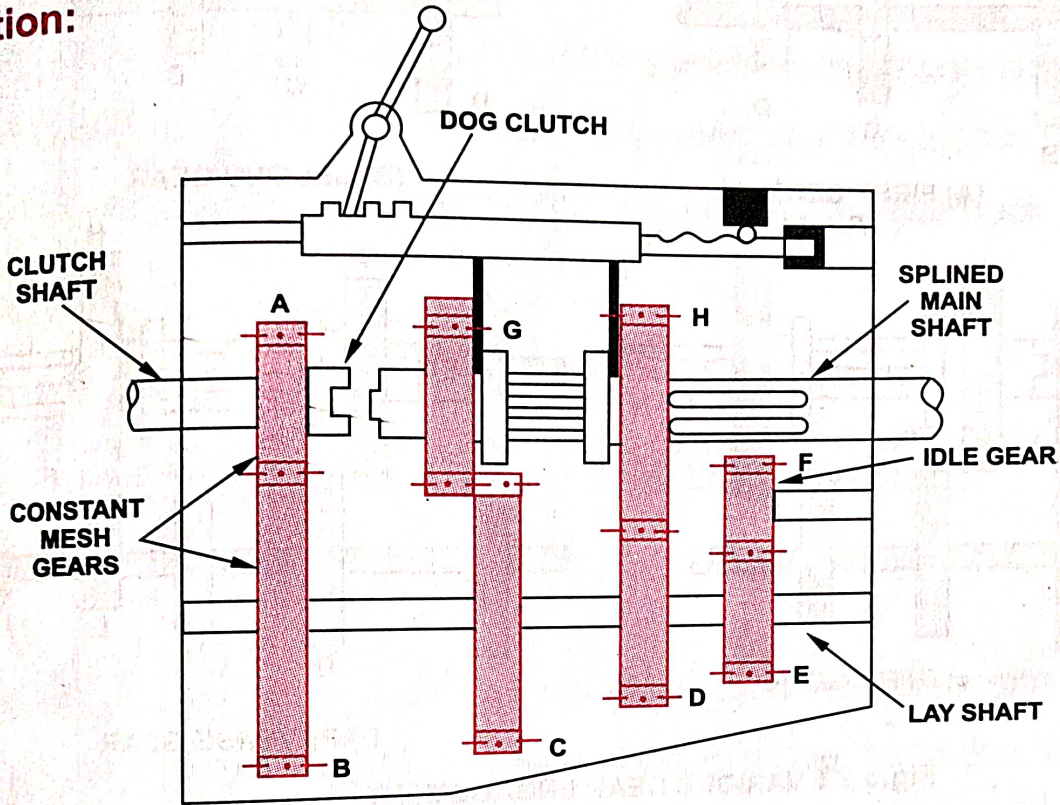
SLIDING MESH GEAR BOX (1ST GEAR ENGAGEMENT)
